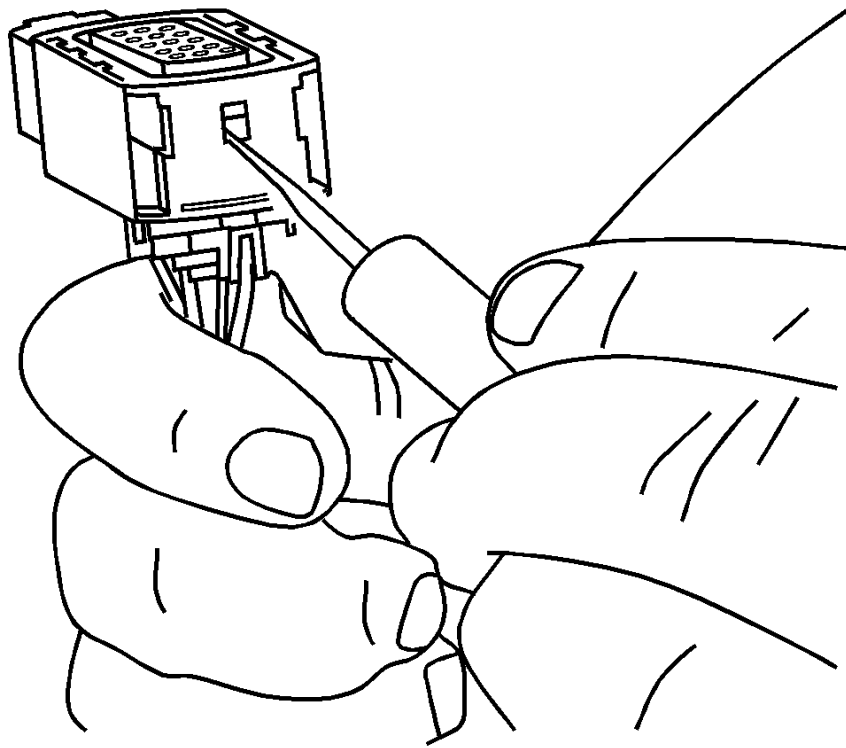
Inserting Special Tool Into Terminal Release Cavity
